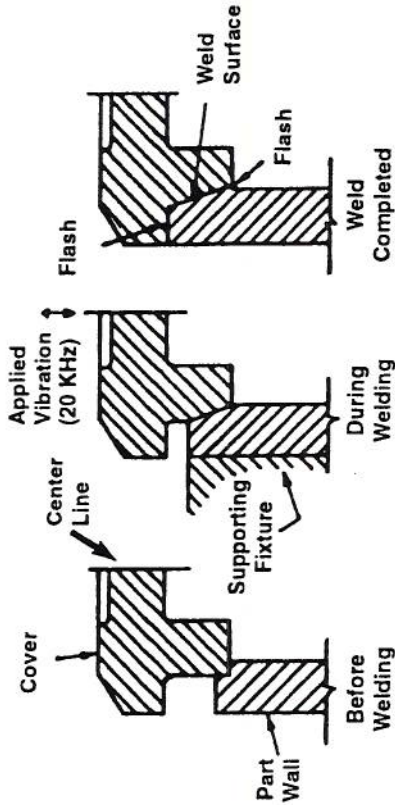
Ultrasonic welding joint design by Du Pont.
